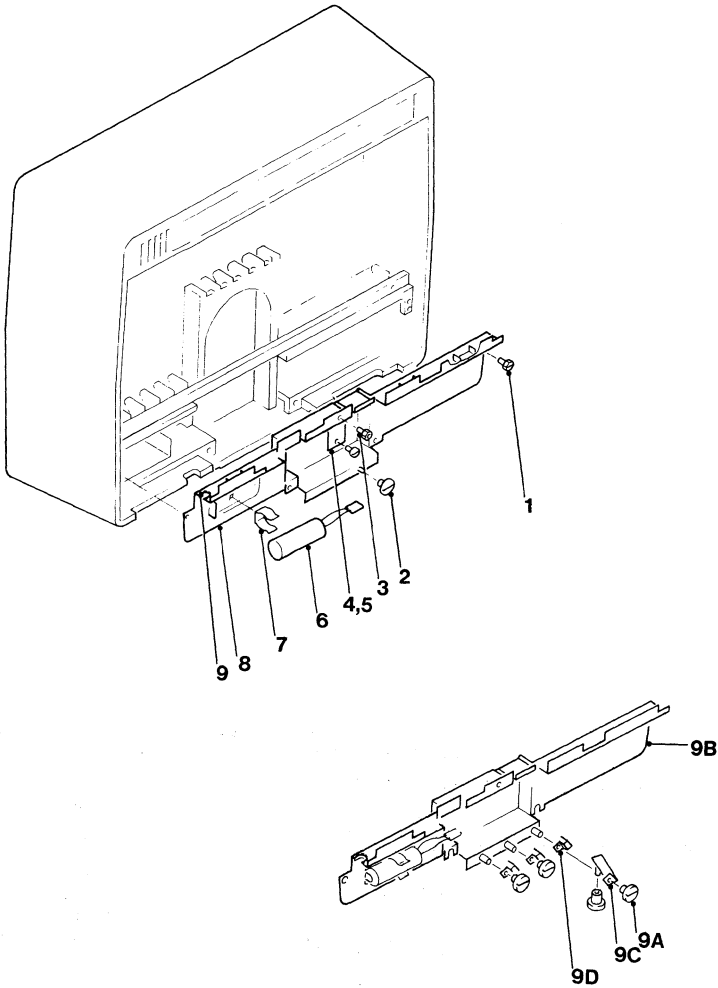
(Sheet 1 of 4). Rear Enclosure Assembly
